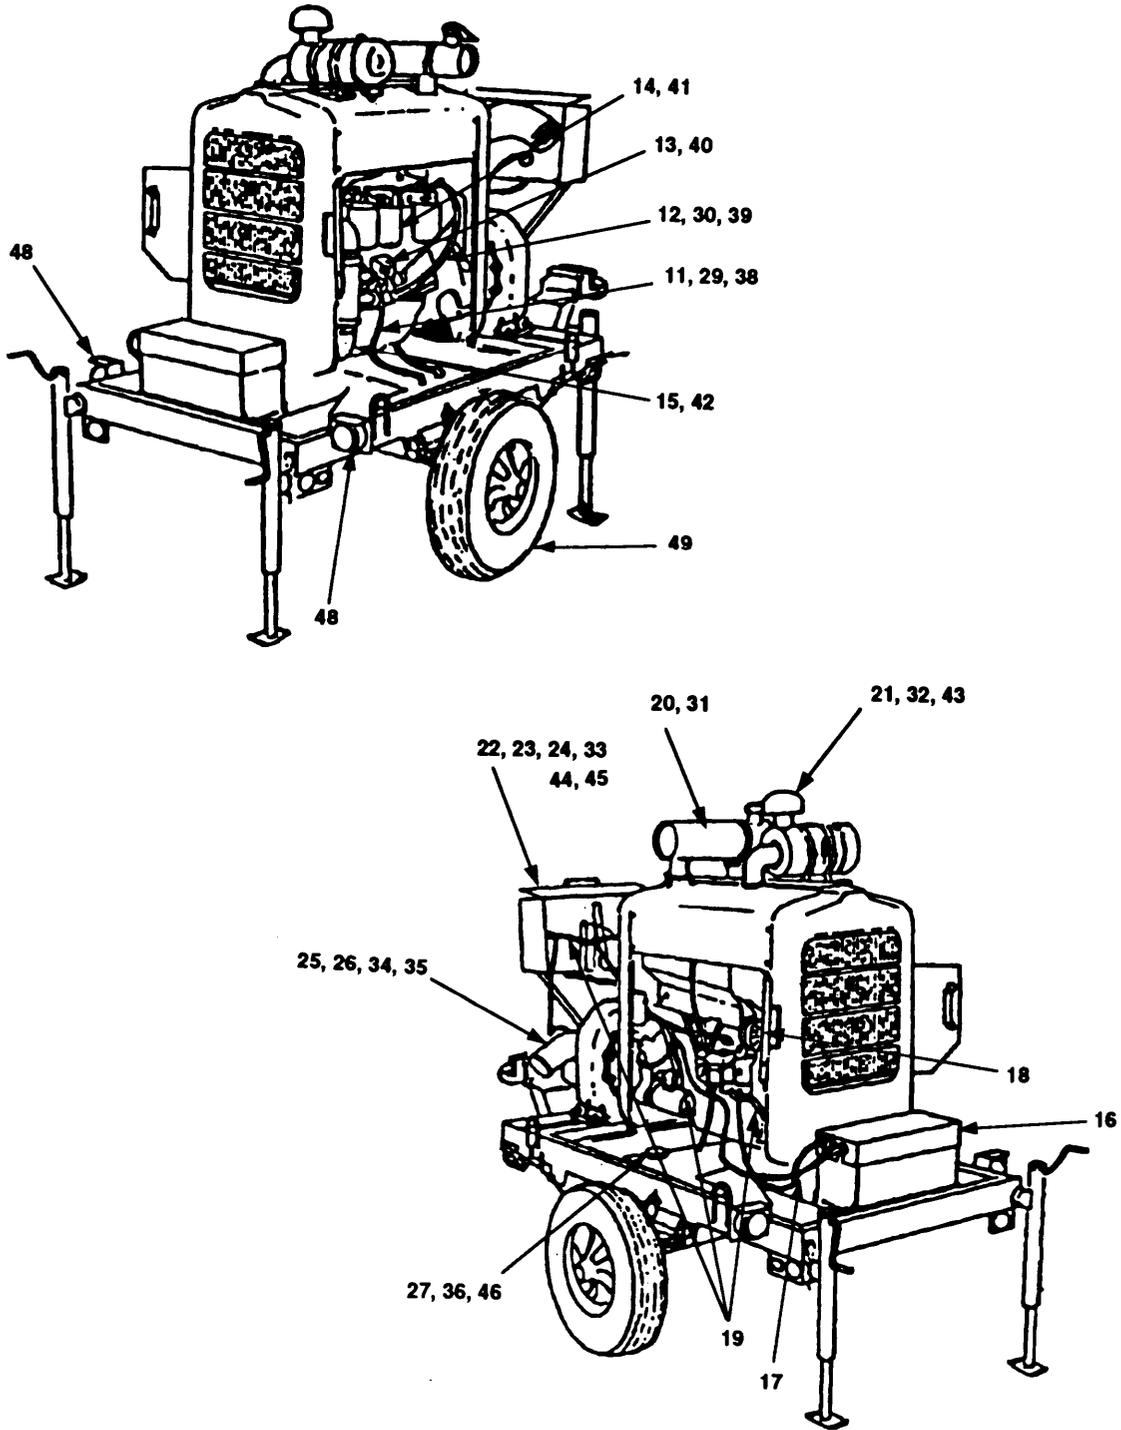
Pumping Assembly Model 609-A PMCS Routing Diagram. (Sheet 2 of 2)
